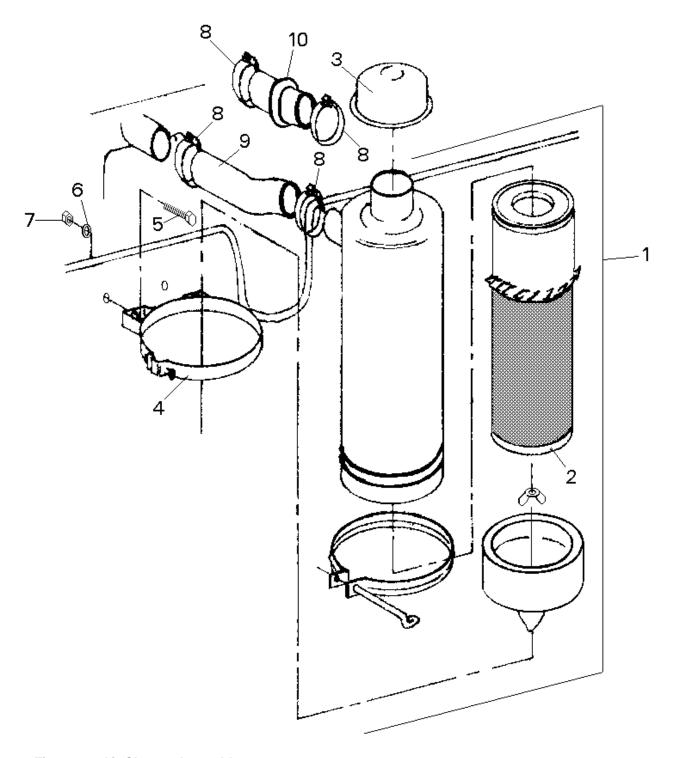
Air Cleaner Assembly, Diesel Engine (Without Pre-Filter)
